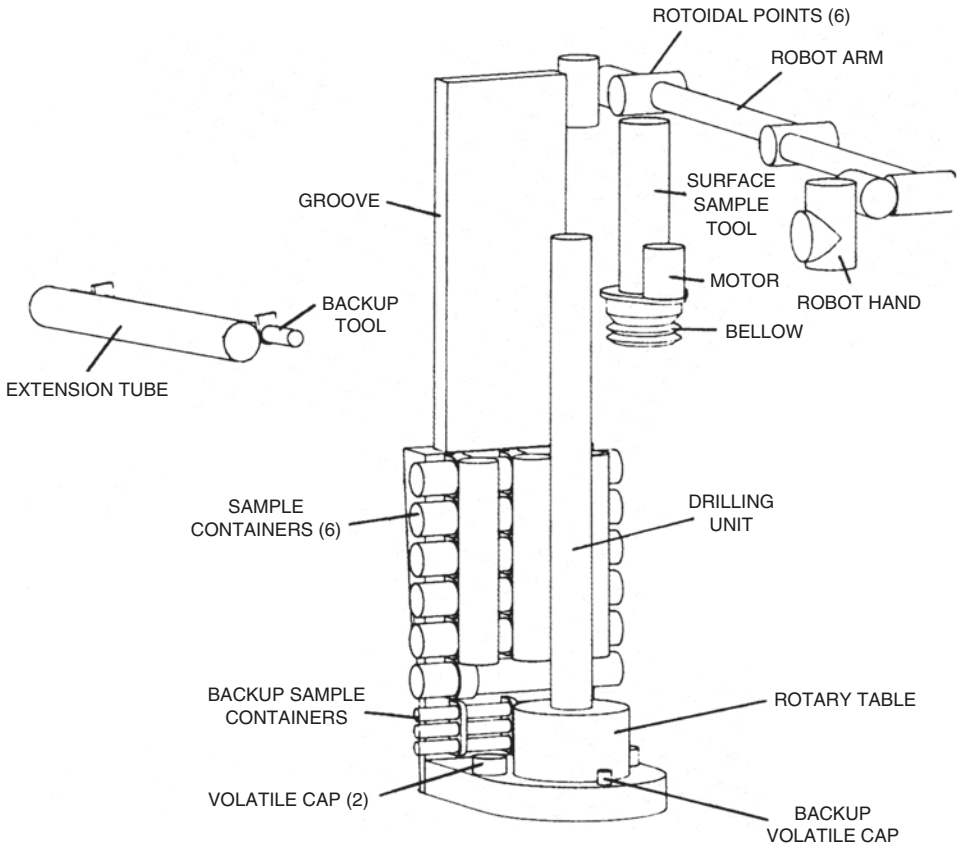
The CNSR comet core sampler consisted of a vertical slide bar, a rotary table, two outer coring tubes with a drill head at the bottom, and six inner core sample containers. The drilling operations were to begin when the rotary table was lowered to the surface. The unit could extract material from a depth of 1-3 meters. (ESA)
